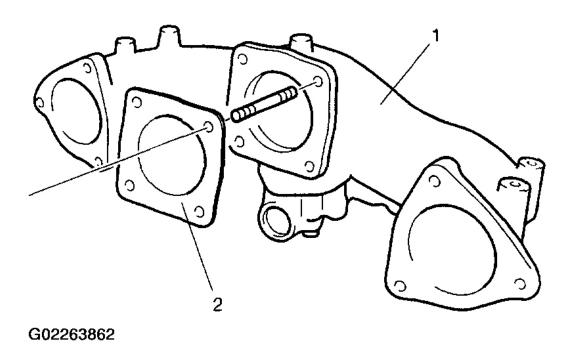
Removing Throttle Body From Intake Collector Courtesy of SUZUKI OF AMERICA CORP.
